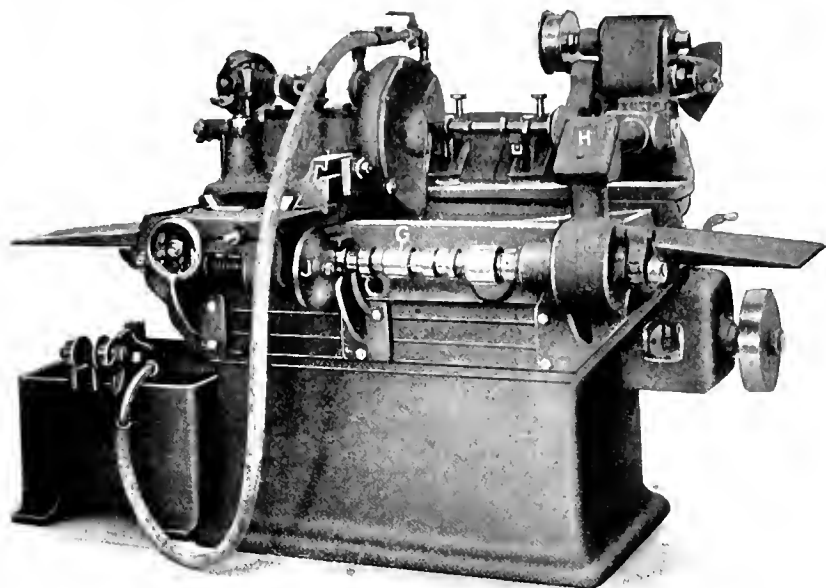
Plain Grinder provided with Master Cam for Operating Wheel-slide, in Grinding Integral Cam Shafts
